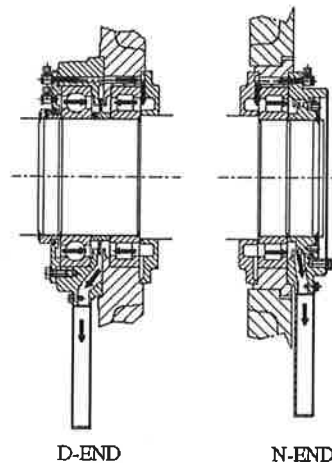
Example of lubrication channel through bearing arrangement of horizontal machine
